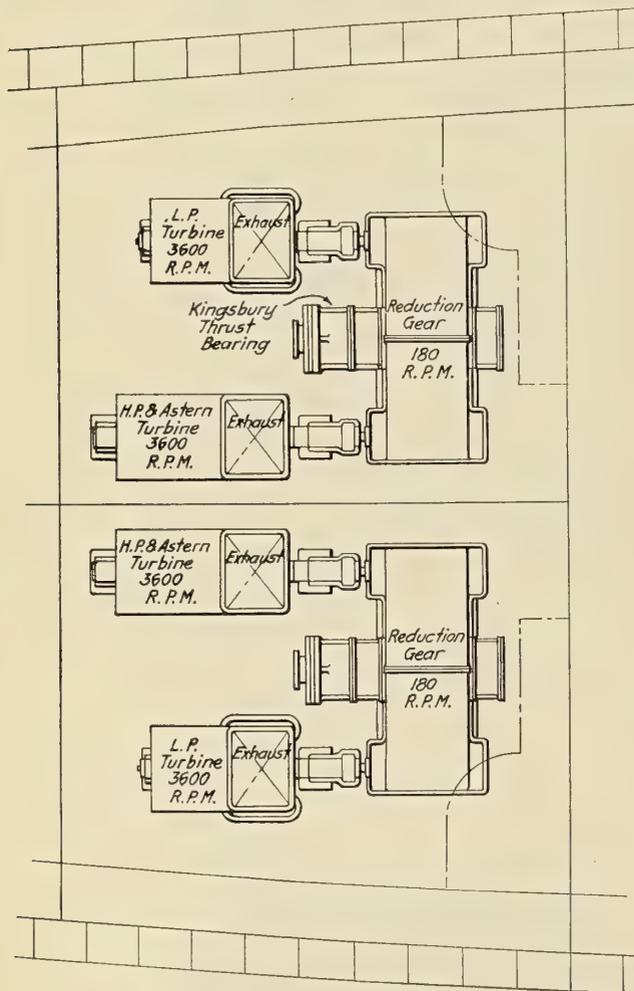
Arrangement of Machinery on Swedish Battleship
